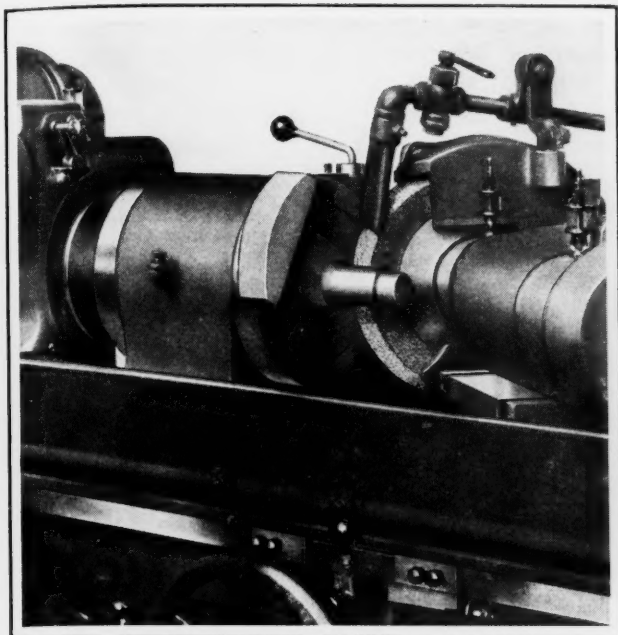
Grinding the Pin of a Two-piece Airplane Crankshaft, Using Special Work-holding Fixtures
